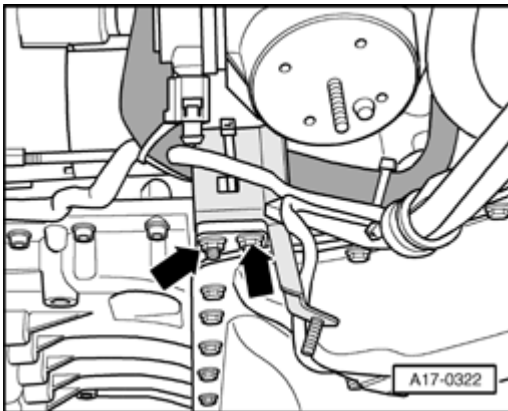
Removing Wiring Harness Bracket On Lower Section Of Oil Pan
